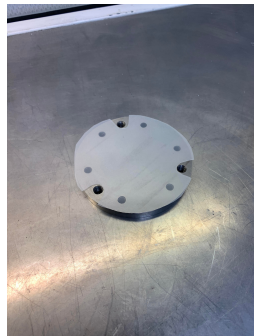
PET foil places between casting mold element 1 and 2.
